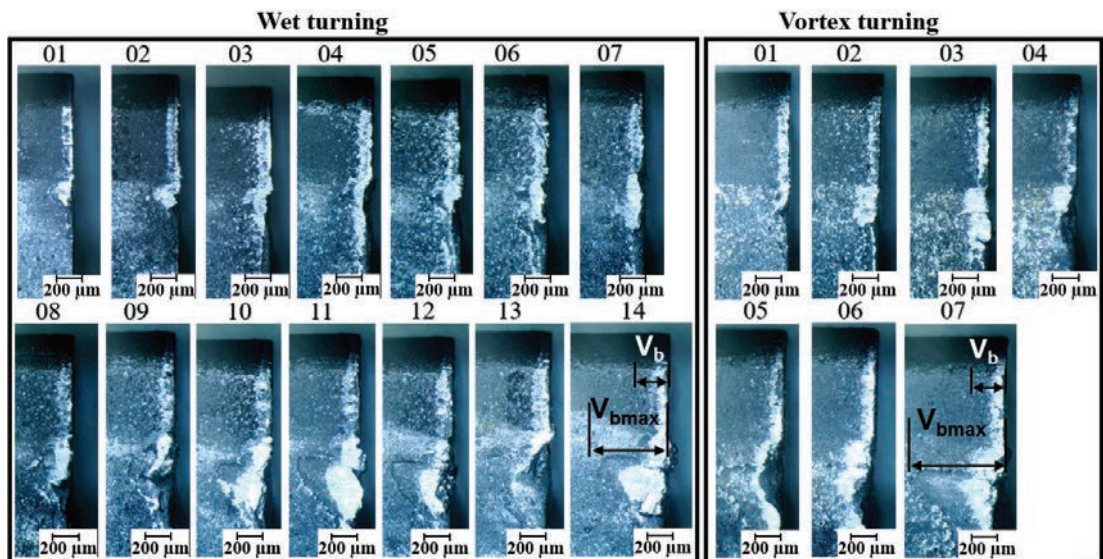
The tool wear (flank wear) inspections at each pass
